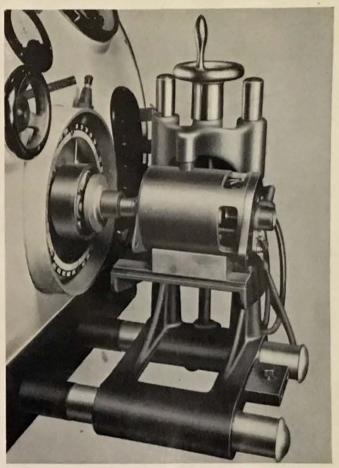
Generator mounted for test, using hexagon drive coupling.
